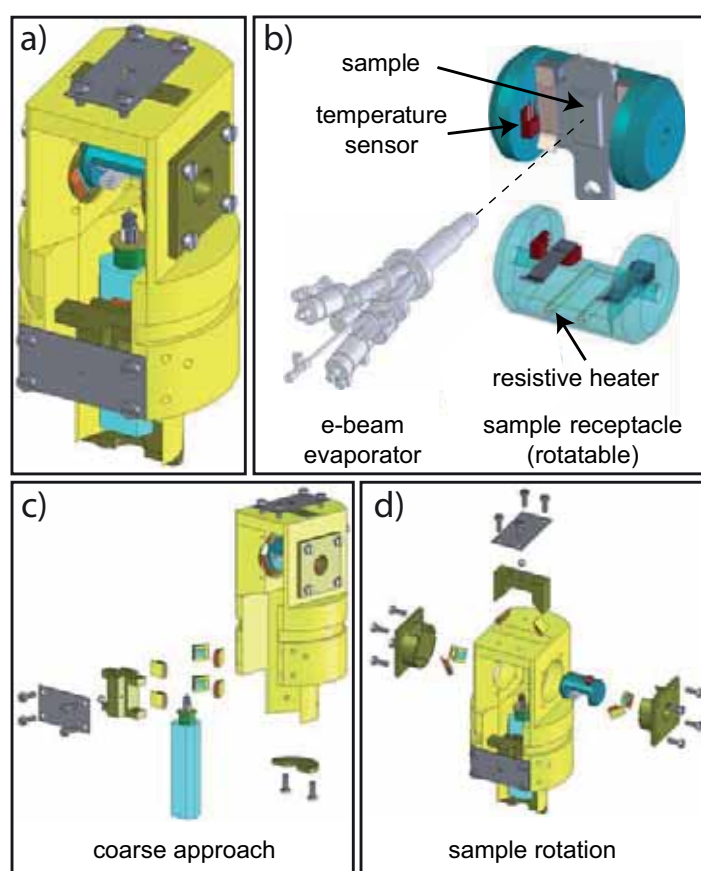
a) Microscope body with the tip approaching from the bottom. b) Adsorbate deposition inside the microscope using the sample rotation mechanism. c) Exploded drawing of the approach mechanism. d) Exploded drawing of the mechanism for sample rotation
